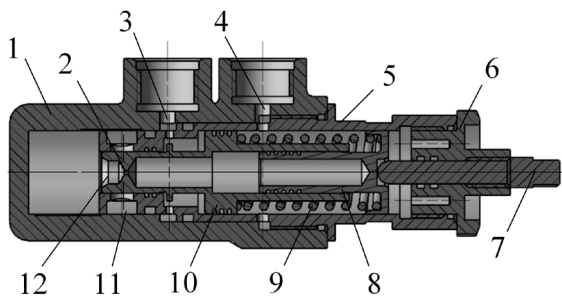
Half sectional view of pressure differential valve; 1 valve enclosure, 2 damping orifice, 3 oil supply pressure inlet, 4 medium cavity pressure inlet, 5 valve body, 6 screw plug, 7 adjusting screw, 8 guide rod, 9 spring, 10 valve spool, 11 overflow orifice, 12 valve inlet
